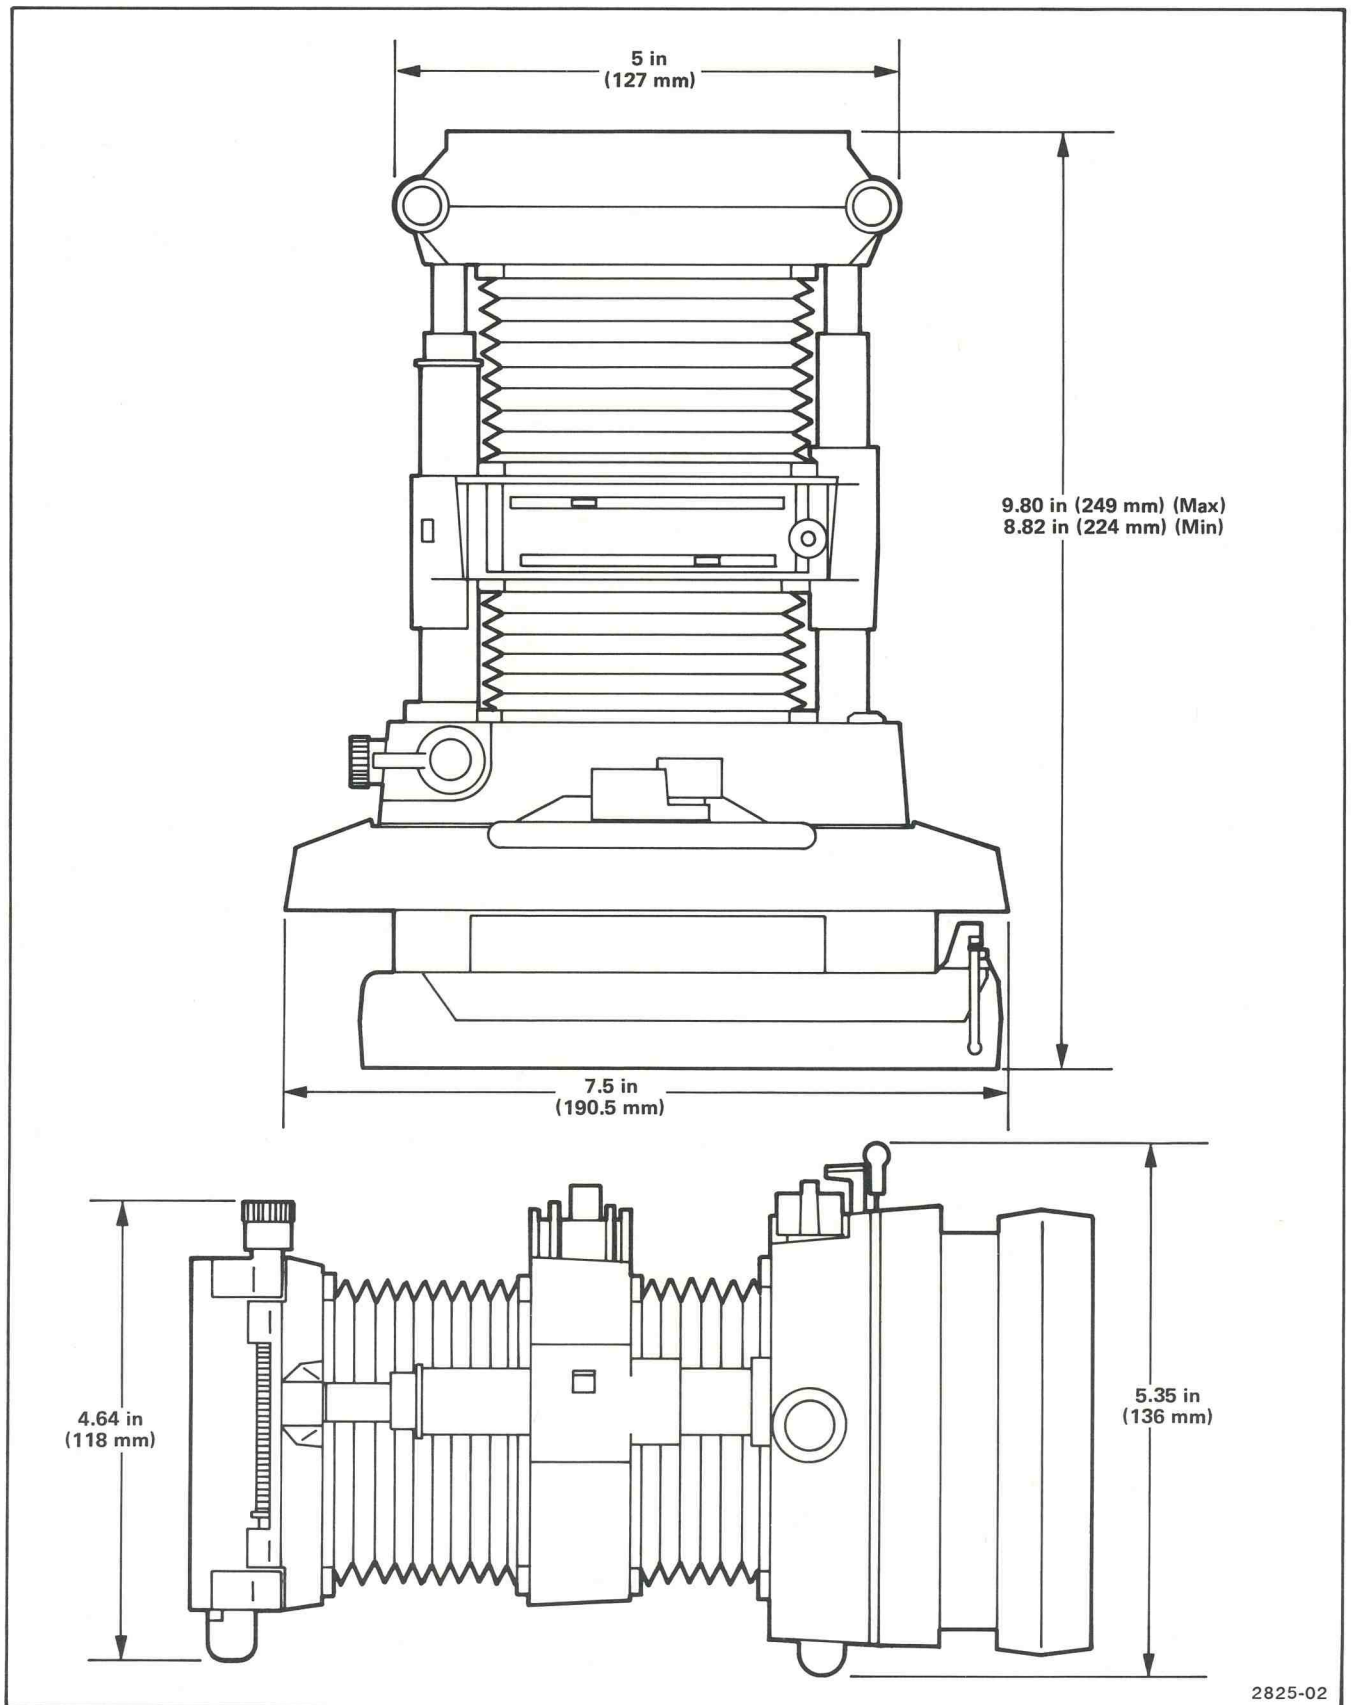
Dimensional drawing with a Polaroid pack-film back attached.
